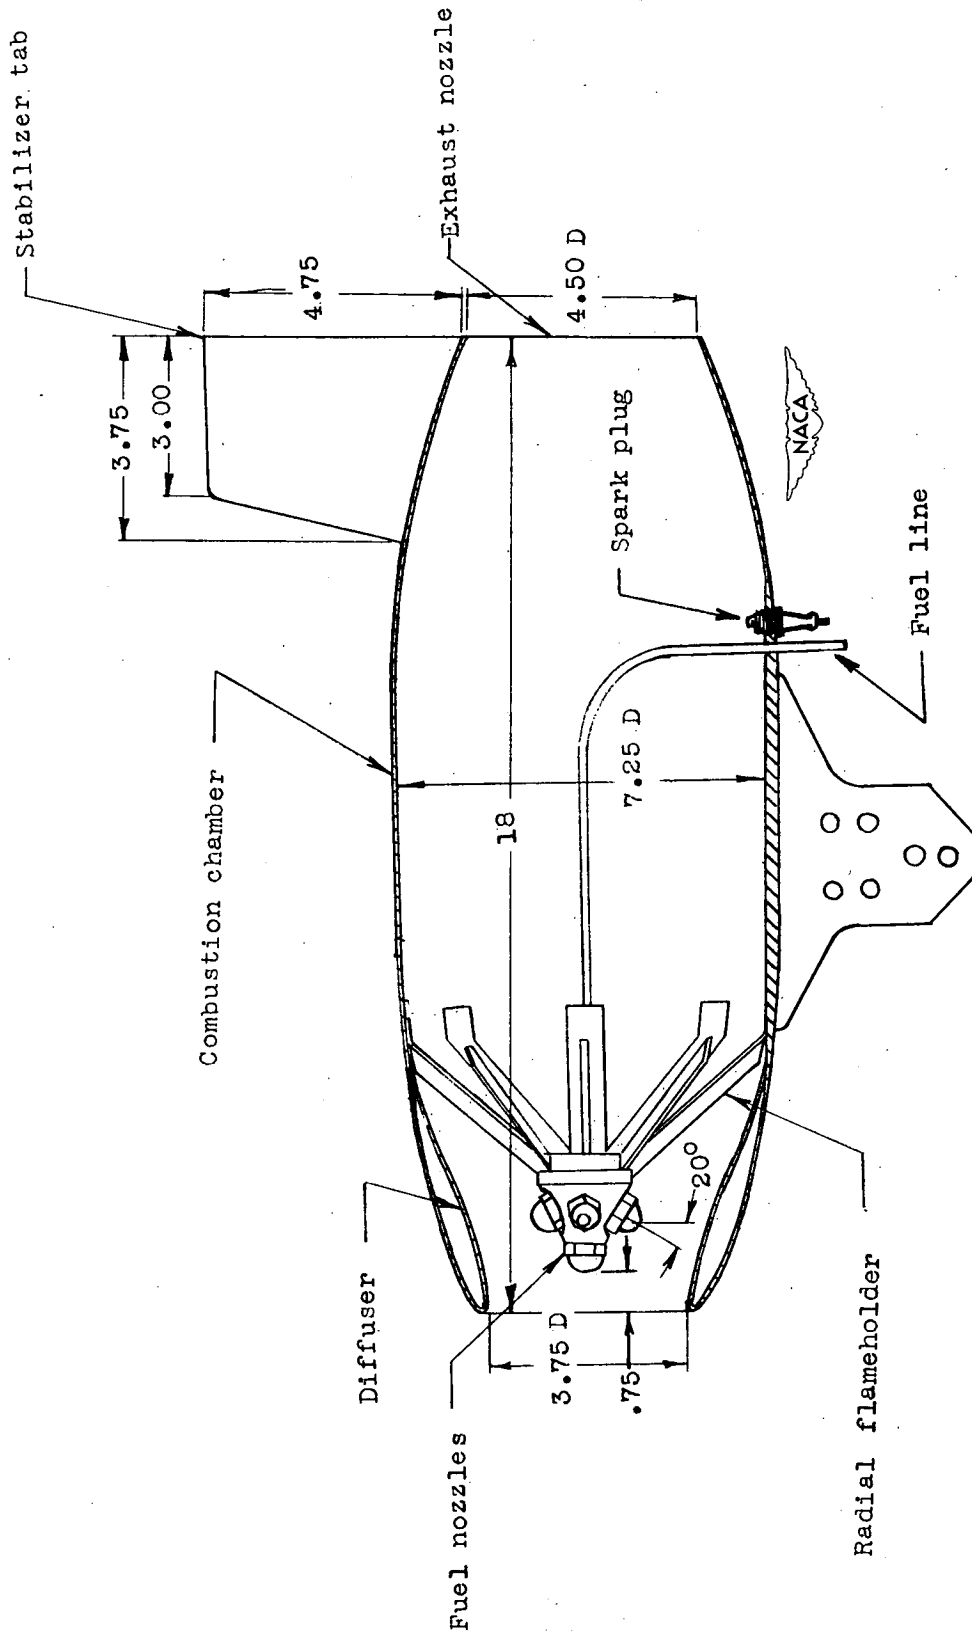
Sketch of ram-jet engine. Jet-engine shell and flameholder made of Inconel X steel. All dimensions are inches.
